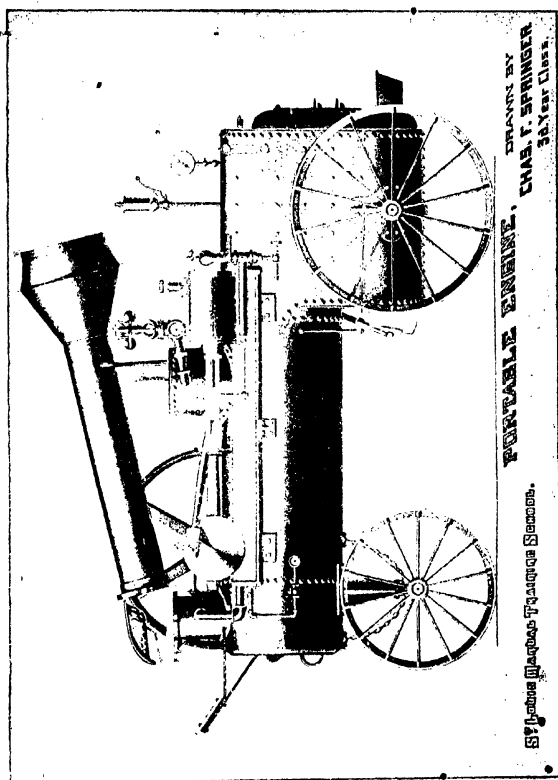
SPECIMEN OF STUDENTS' DRAWING FROM ACTUAL MEASUREMENT.
